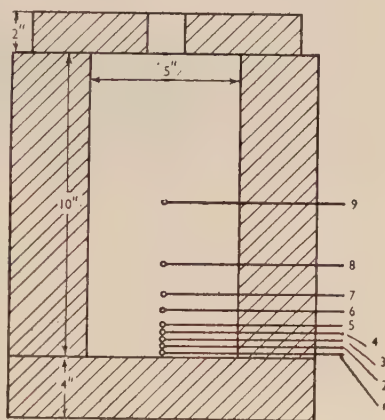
Details of Mould and Positions of Thermocouples in Vertical 5 in. dia. \times 10 in. Cylinder Casting.
